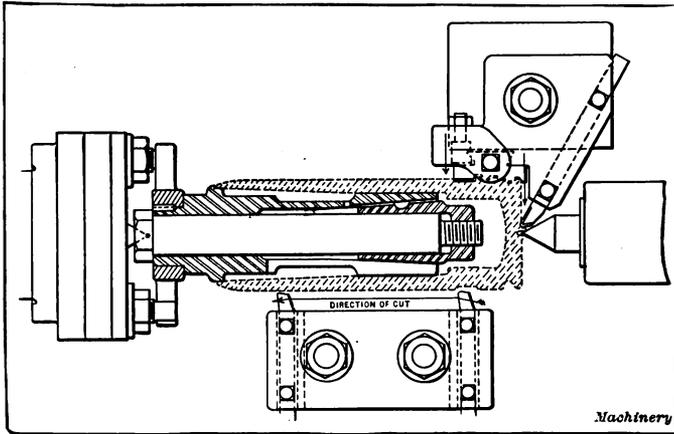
Combination Threaded and Expanding Arbor for holding Shrapnel Shell in Lathe
